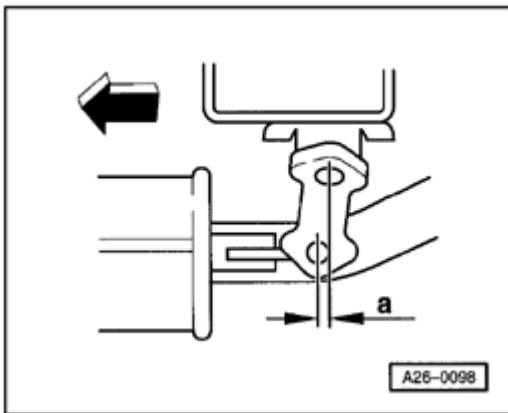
Pushing Rear Section Of Exhaust System Toward Front Of Vehicle
